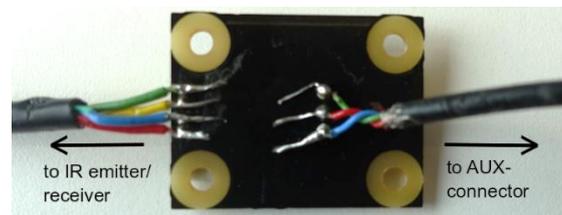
Ground plate of IR sensor after soldering cables to IR emitter/receiver and to the AUX-connector
